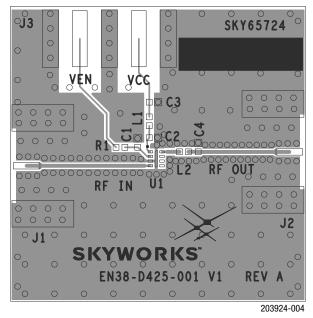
SKY65724-11 Evaluation Board Assembly Diagram
